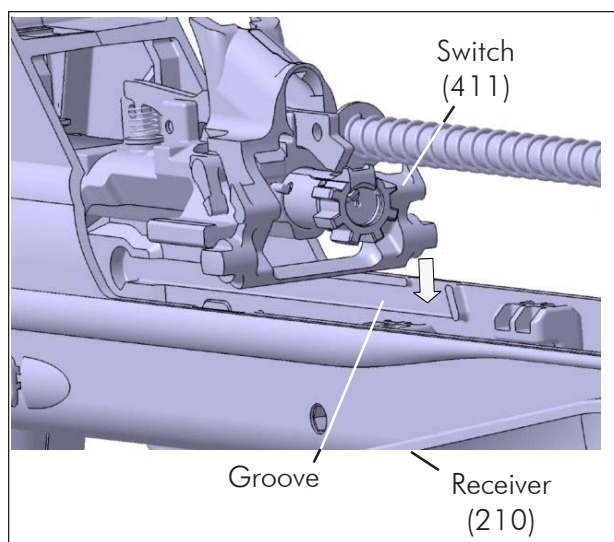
p - Engaging the switch (411) in the grooves of the receiver (210)
